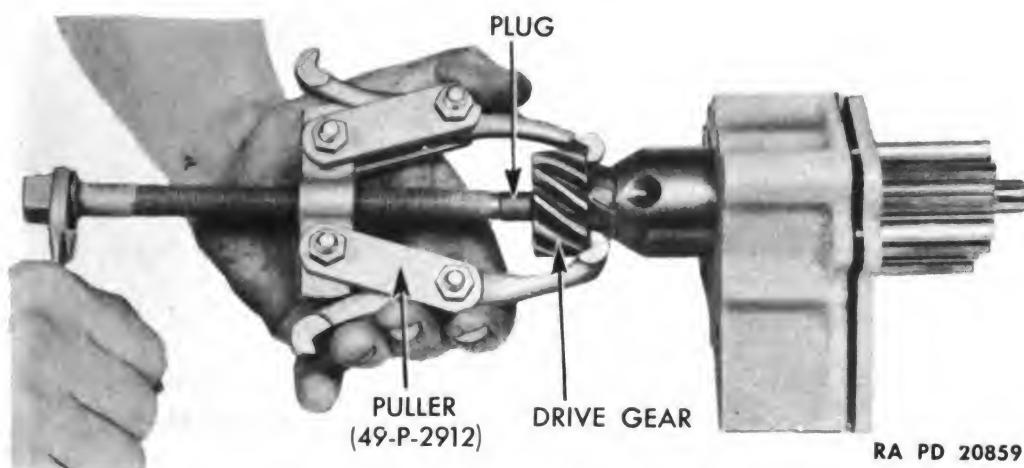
Removing Scavenger Pump Drive Gear, Using Puller
